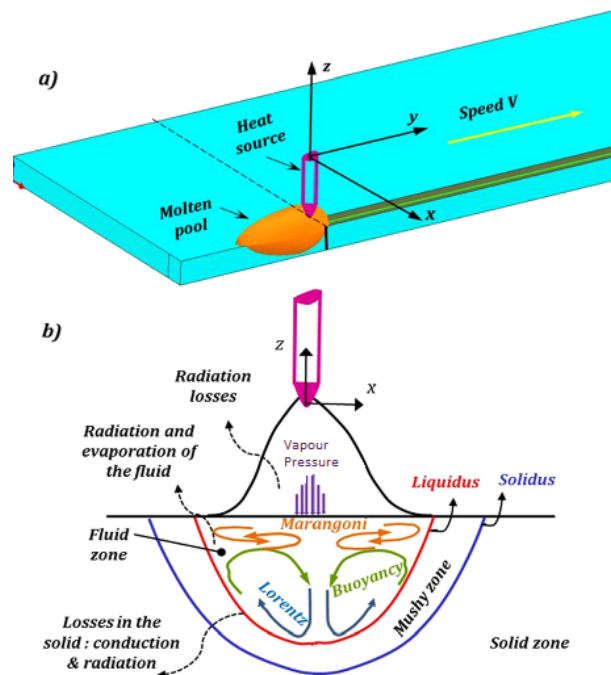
(a) Scheme of the welding procedure, (b) Representation of the material states and fluid flow in the molten pool during the welding process [11].
